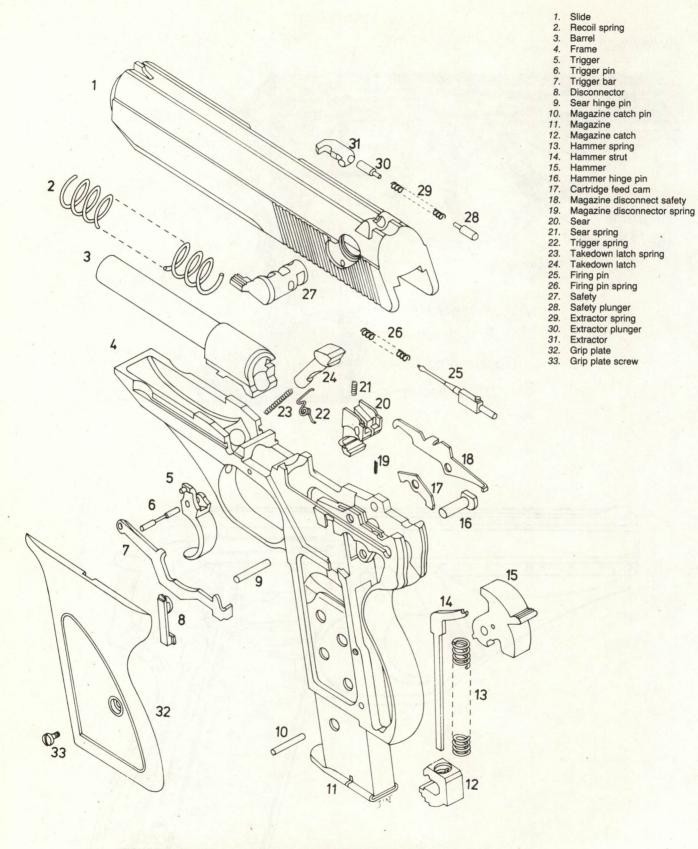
An exploded view of the Mauser HSc. (Jimbo)
